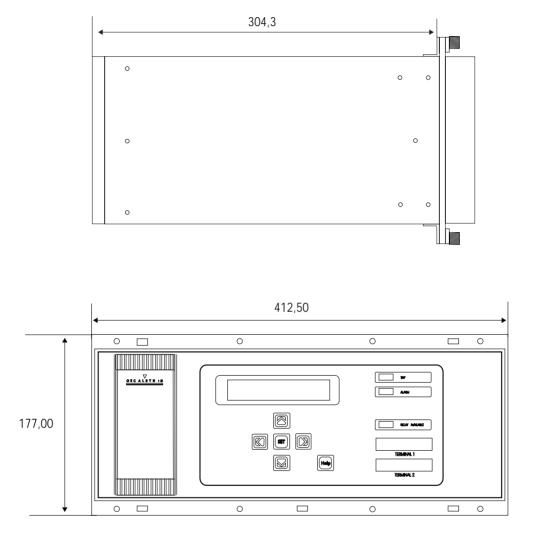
Rack dimensions when frame-mounted (EPAC 3100)
